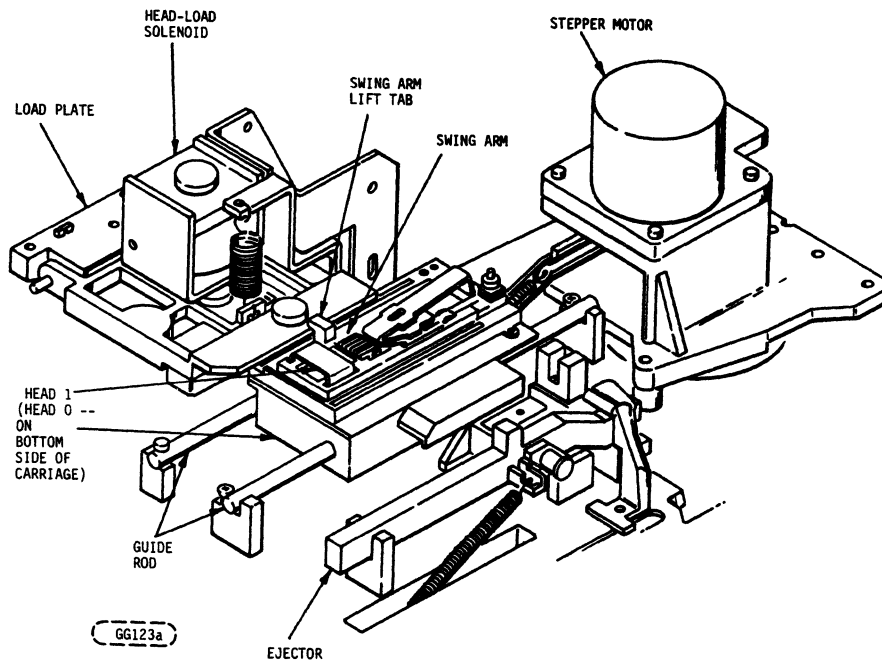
HEAD-LOAD CARRIAGE AND STEPPER MOTOR DETAILS
